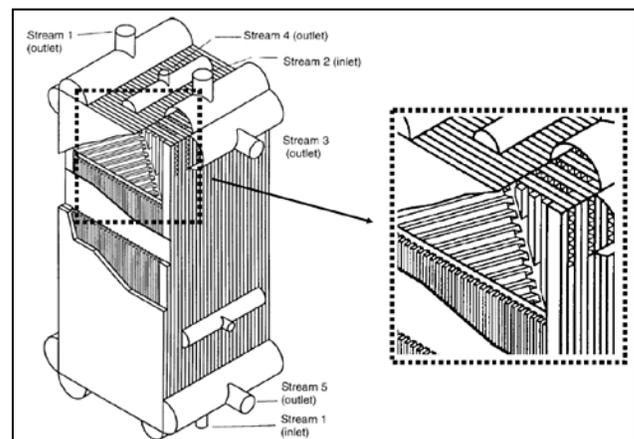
Illustration of a typical multi-stream brazed aluminium plate-fin heat exchanger
